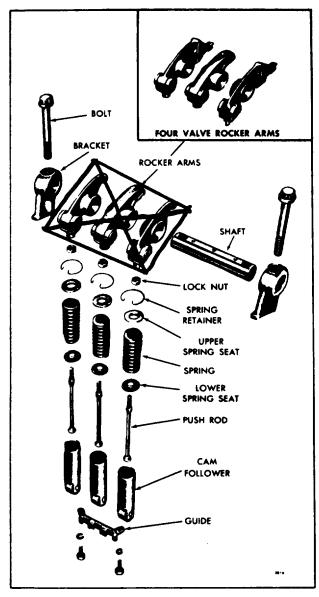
Valve and Injector Operating Mechanism Details and Relative Location of Parts
